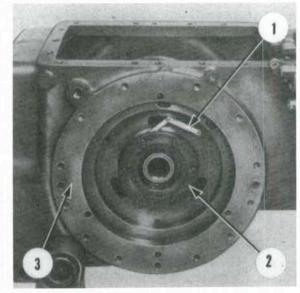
Use a feeler gage (1) to measure gap between right-hand bearing retainer (2) and rear axle housing (3) to determine proper shim pack thickness required for adjustment of differential carrier bearing preload. Refer to text.
